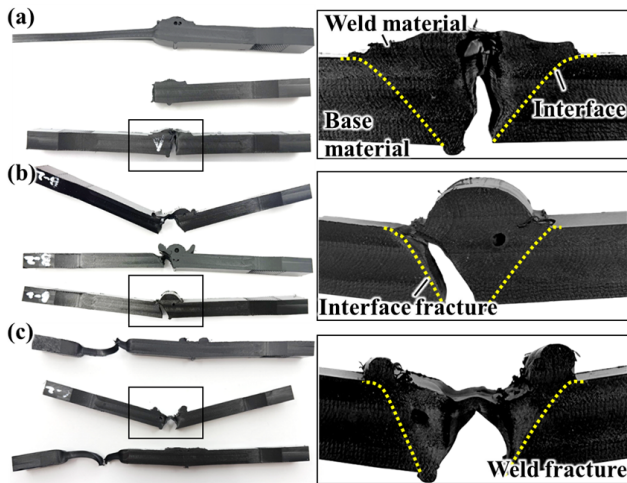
Fracture locations of tensile specimens without weld bead (a) butt shoe, (b) round shoe, (c) round shoe with press tool
